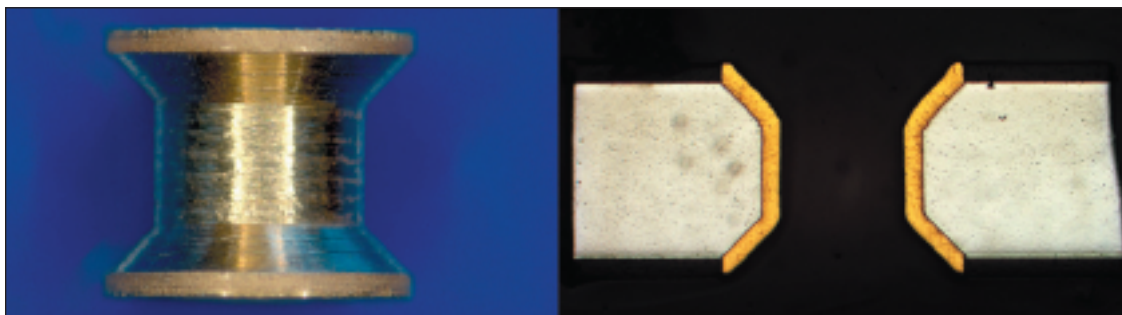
Final electroformed gold tube, left, and cross-section of gold tube before aluminum template removal, right. Images courtesy FEM, Germany.
